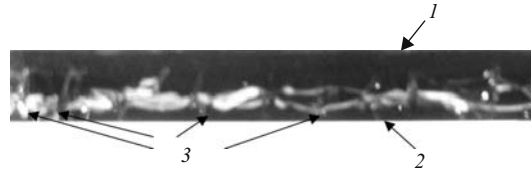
Character of fracture of the end of glass sample in determining thermal stability: 1) laser-cut edge; 2) smooth edge; 3) cracks.
